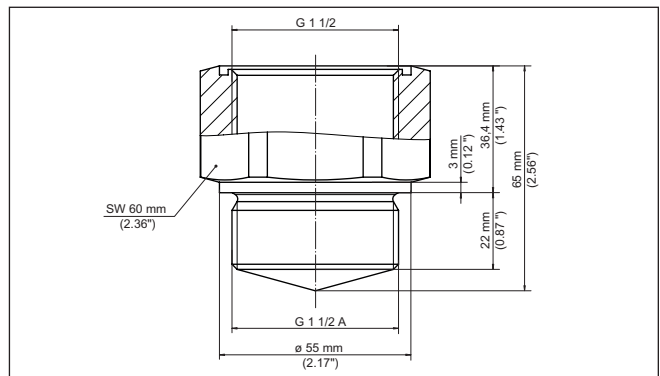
Dimensions of threaded adapter G1½ (DIN 3852-X) on thread G1½, G2 (DIN 3852-X)
